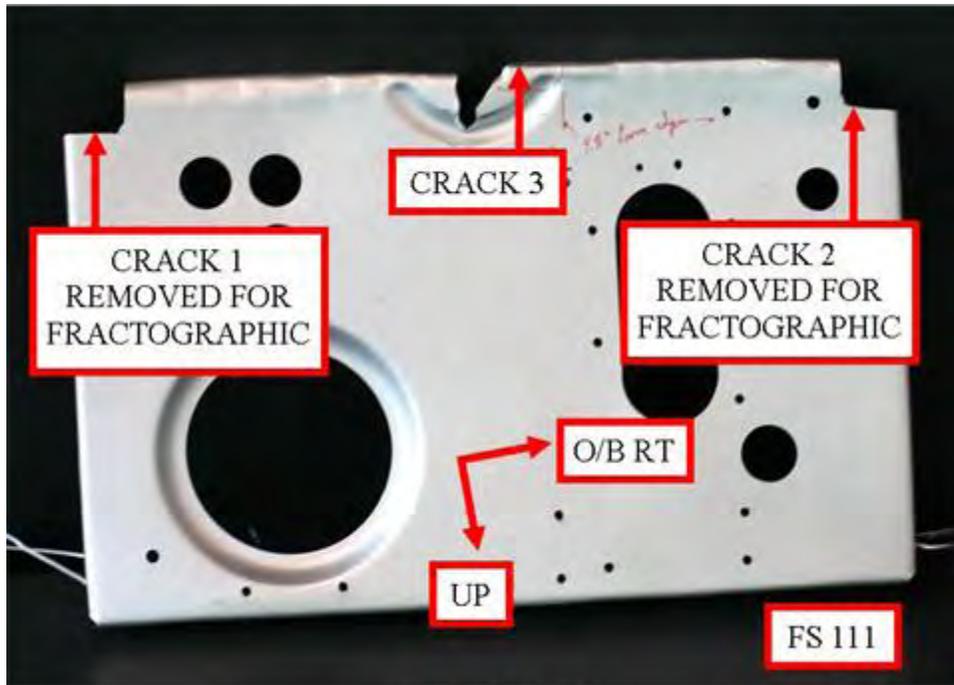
Macroscopic View of Crack and Wear on the Left Lower Forward Longitudinal Frame Beam Assembly FS 106 Through FS 120
